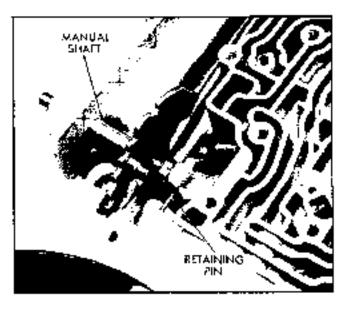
Removing Monum' Shoft Retaining Pin From Cage.
